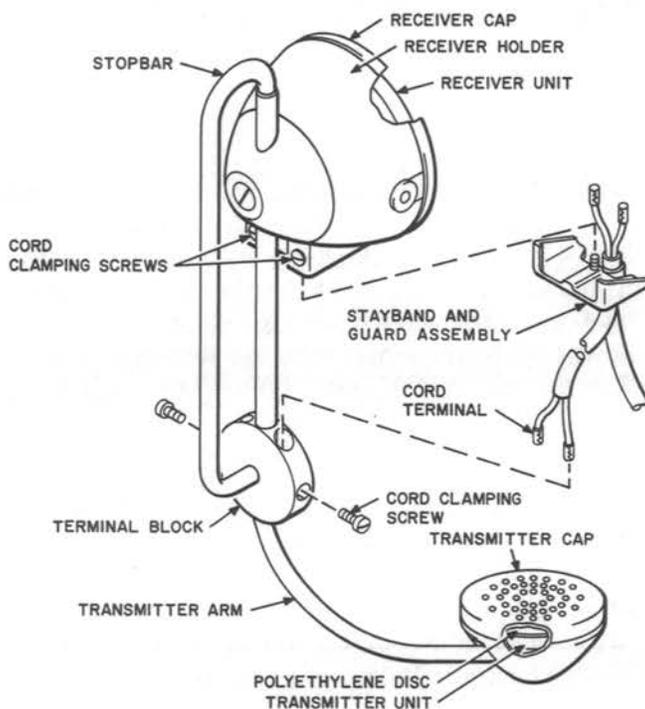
Transmitter Arm Assembly and Receiver Holder
